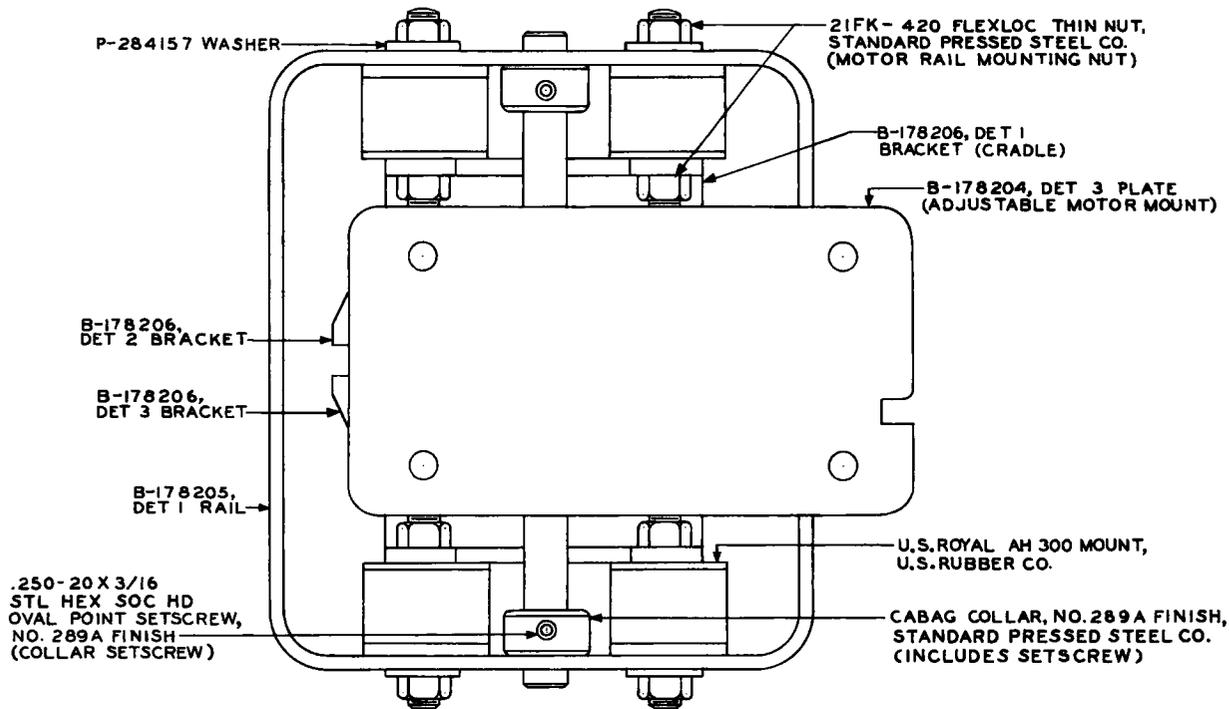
Motor Rail, Adjustable Motor Mount, and Associated Parts
